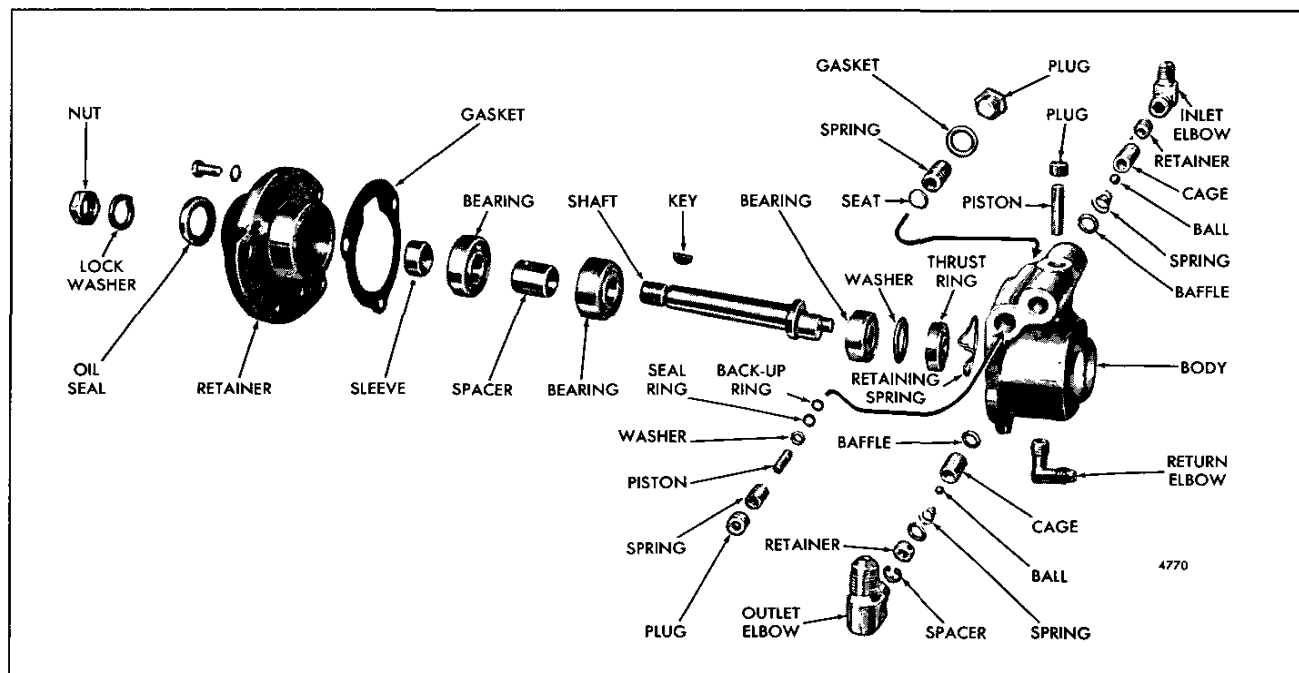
Belt-Driven Charging Pump Details and Relative Location of Parts
